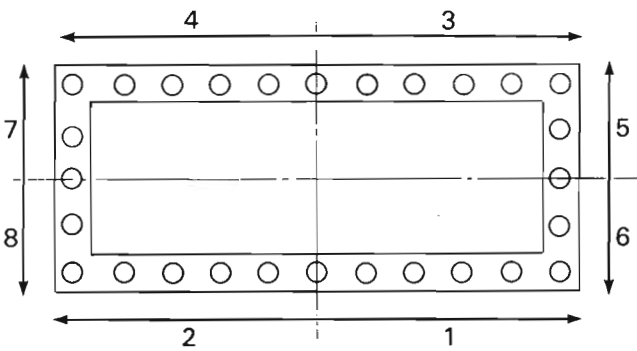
Simplified Oil Cooler Core-To-Header Casting Applications
